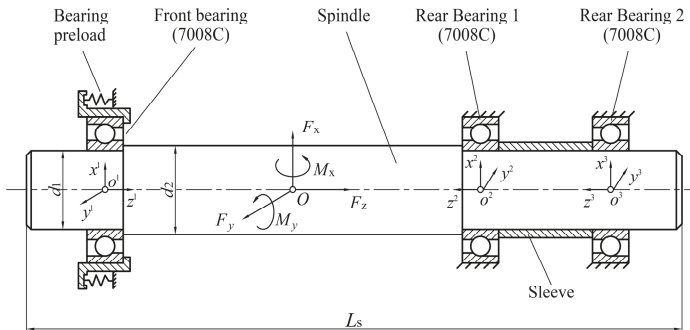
Shaft-bearing system with three angular contact ball bearings.
